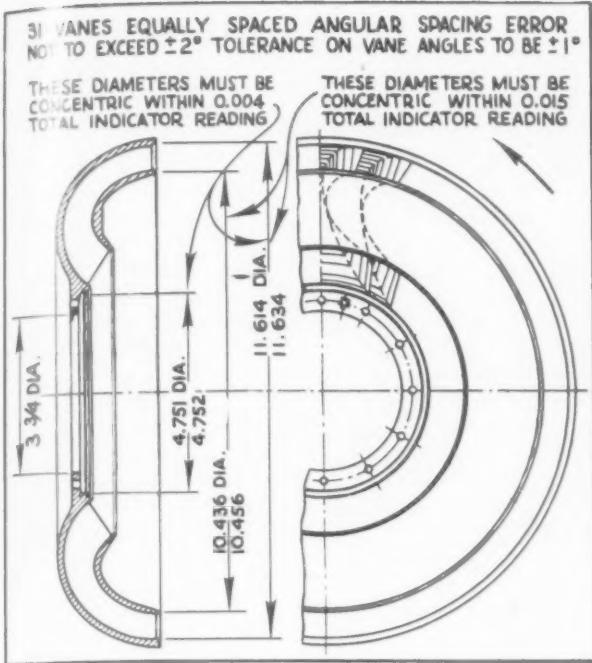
Line drawing, showing the shape and general dimensions of the turbine unit of the Buick "Dynaflow" drive.
